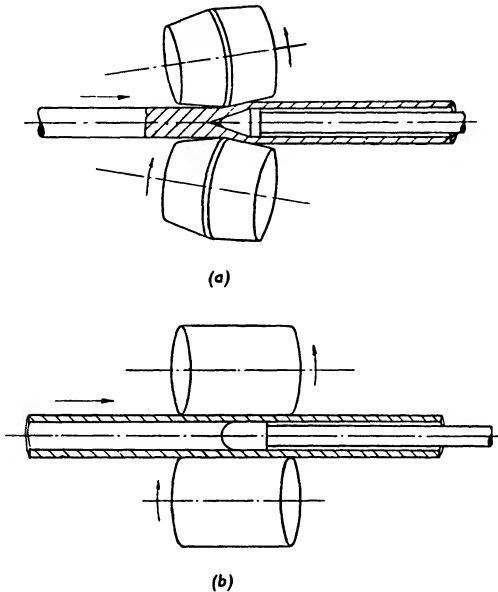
MANUFACTURE OF SEAMLESS TUBE
